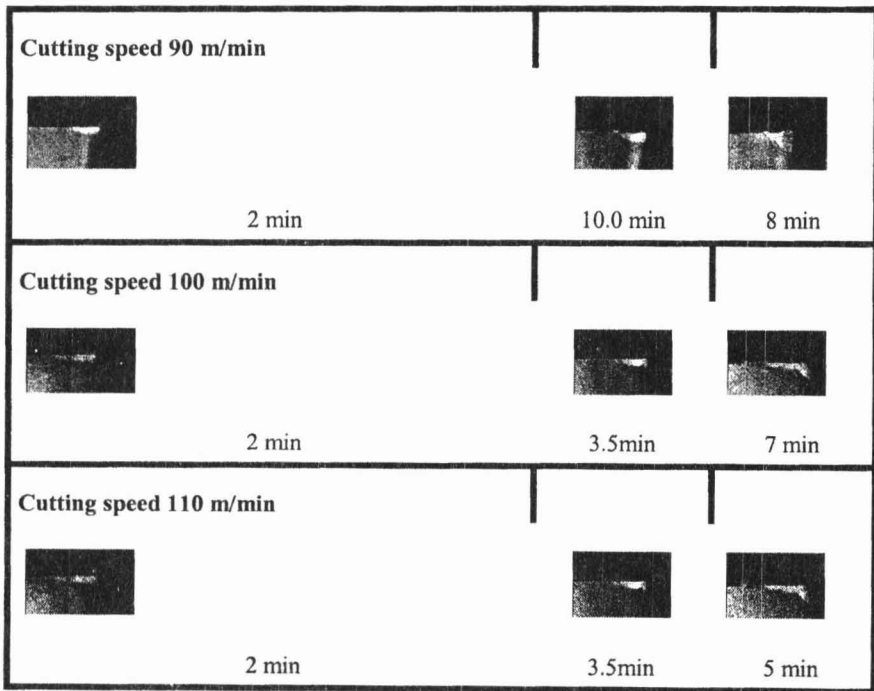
Flank Wear at Various Cutting Speed using Nozzle Size of 2.0mm
